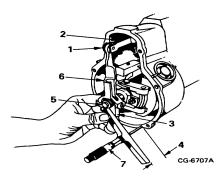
Measuring Slider-to-Housing Distance (If Guide Bolt Gauge 1 682 329 038 is not available)
